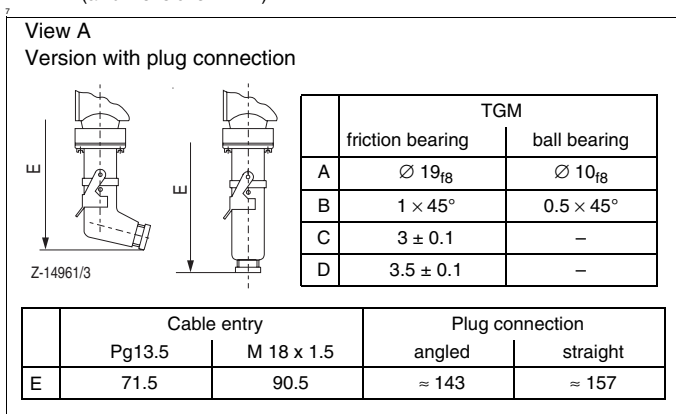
Dimensional drawing of TGM5 (-Ex) with flange mounting
